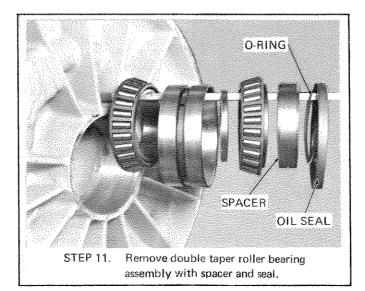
Removal of Drum Shaft and Drum (Sheet 2 of 2)
